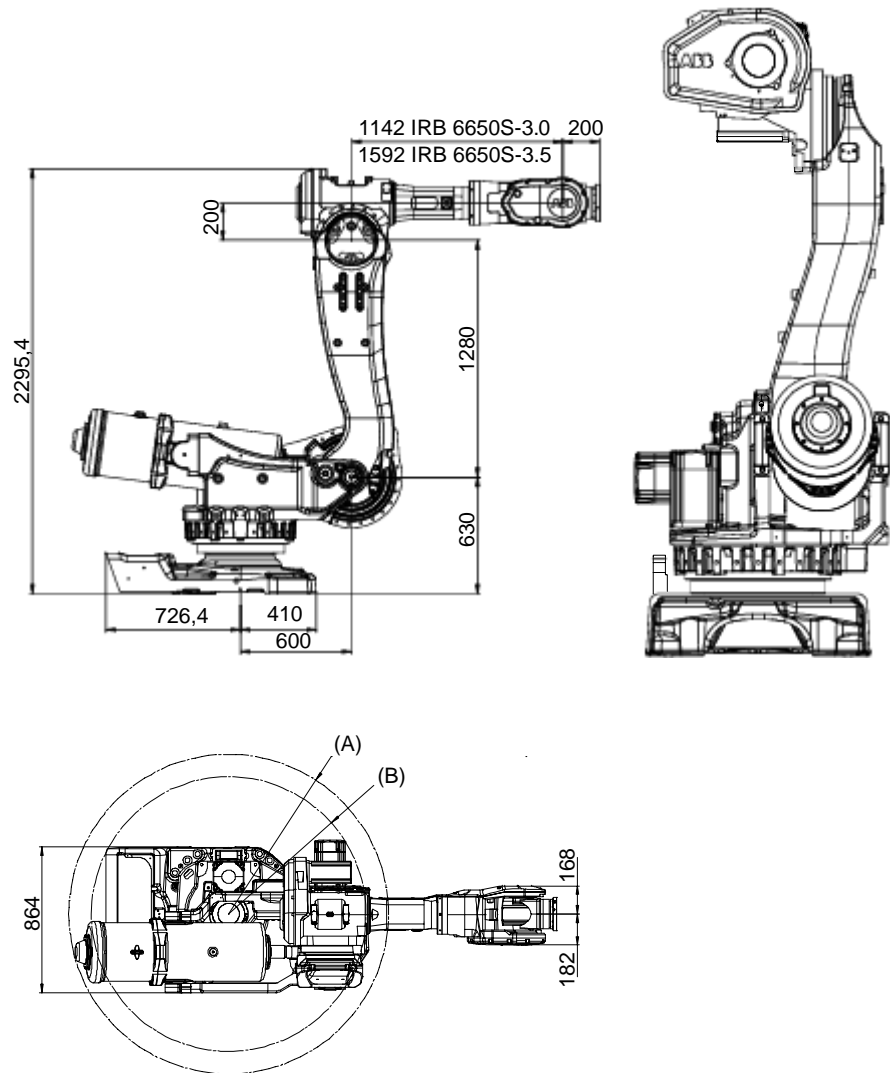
View of the IRB 6650S Manipulator from side and above (dimensions in mm). Allow 200 mm behind the manipulator foot for cables.
